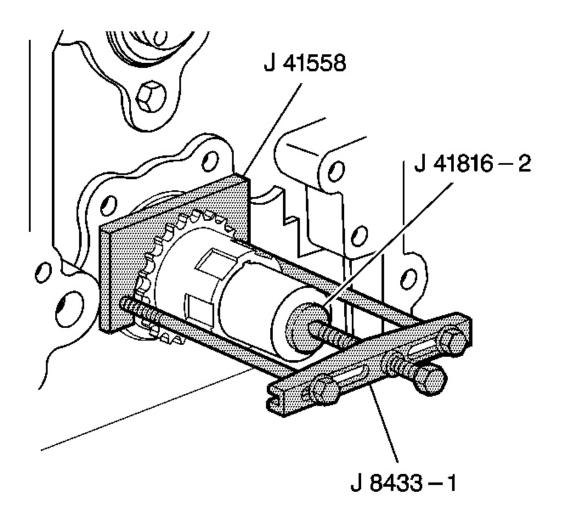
Removing The Crankshaft Sprocket Using J 8433-1, J 41816-2 & J 41558 Courtesy of GENERAL MOTORS CORP.
